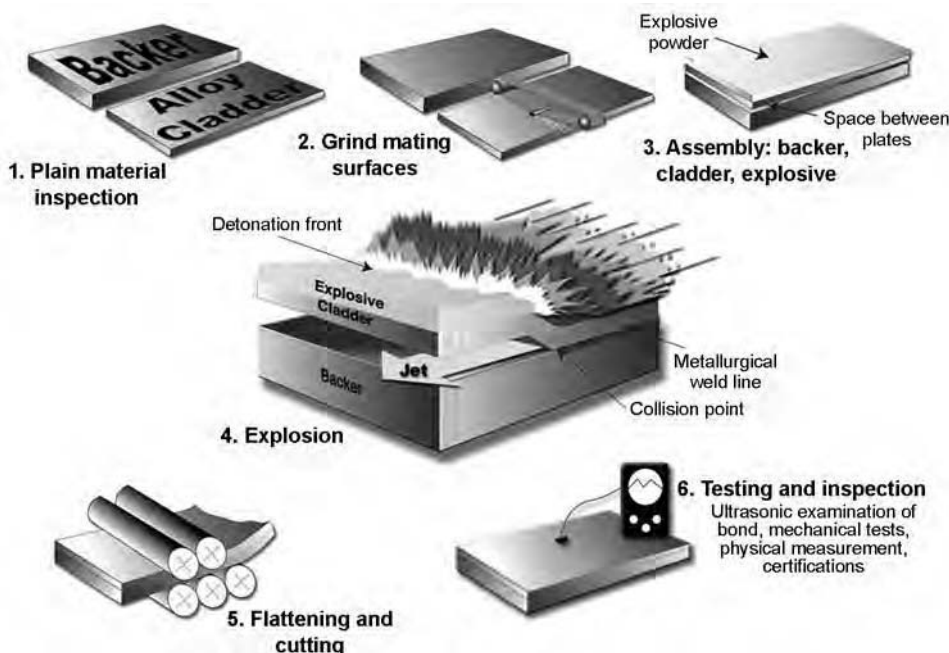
Schematic of typical explosion clad plate manufacturing sequence
